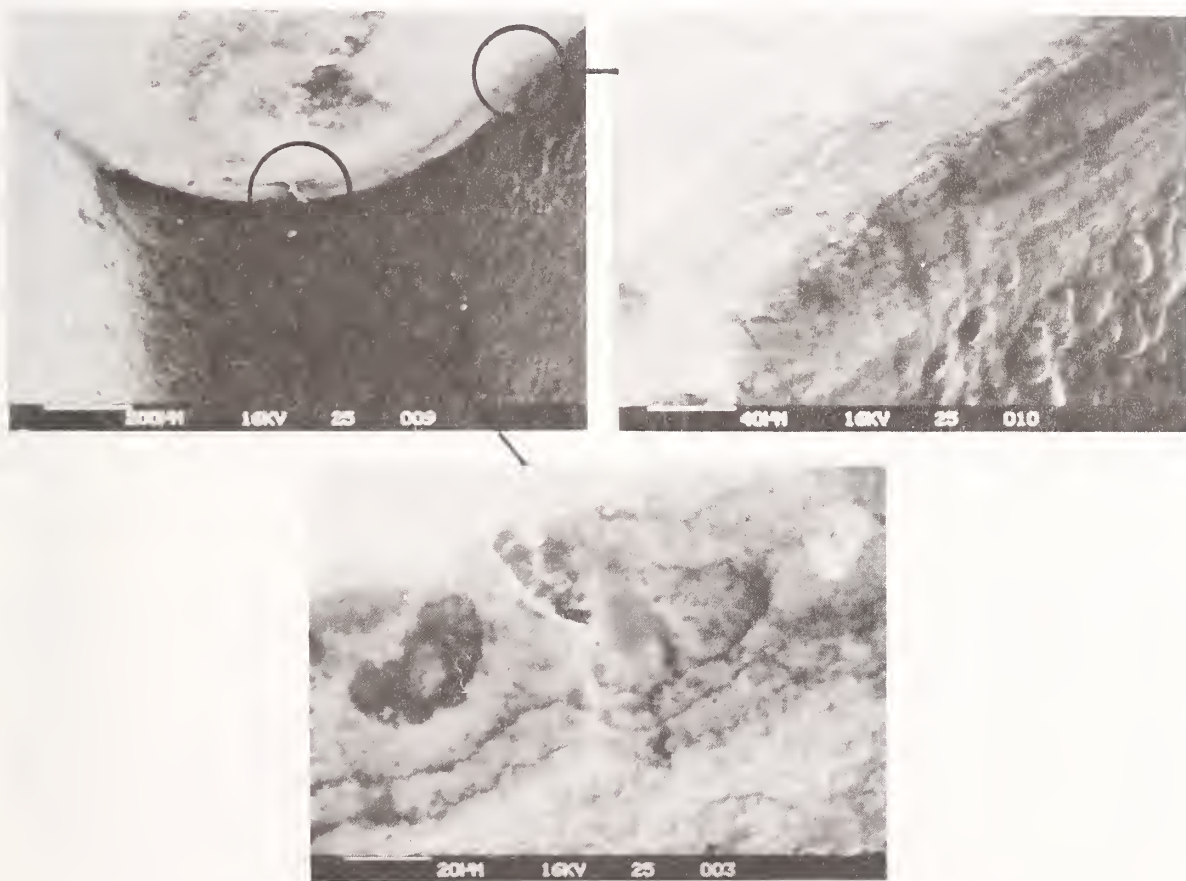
Comb-cracking observed on TiN coated K-type substrate tools (CFRP Machining)
